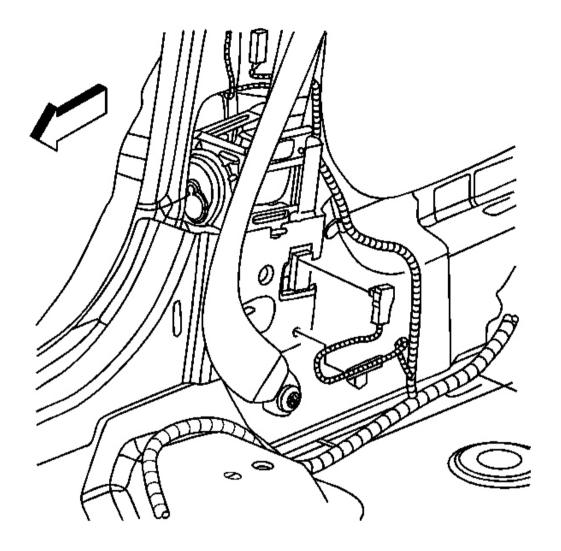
View Of Seat Belt Wiring Harness Routing Courtesy of GENERAL MOTORS CORP.
